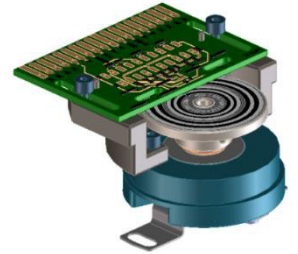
Evaluation Board (AEDR-9820E and AEDR-9830E) Mounting Concept
